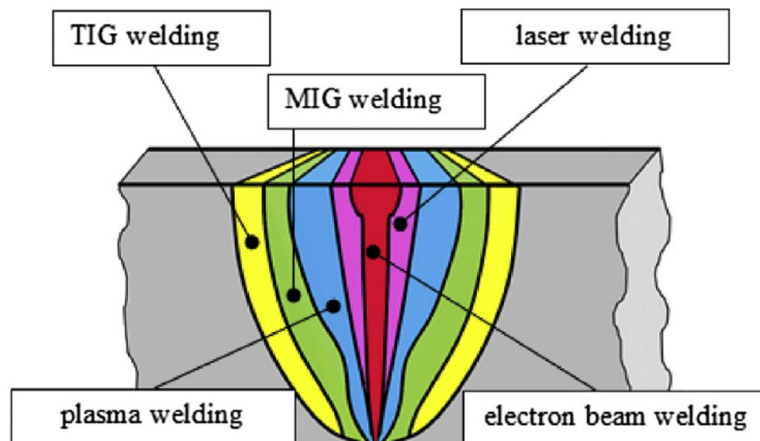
Geometry of butt weld of different welding processes [22].
